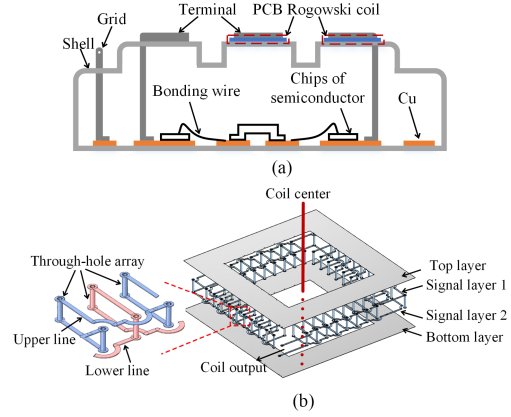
PCB Rogowski coil (a) installation drawing in an IGBT power module. (b) Three-dimensional structure view.
